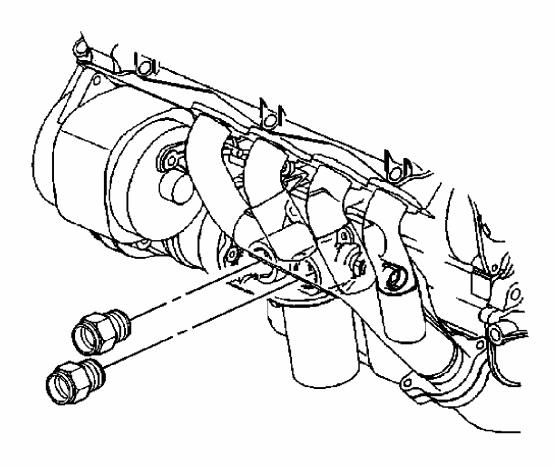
View of Engine Oil Cooler Quick Connect Fittings Courtesy of GENERAL MOTORS CORP.
